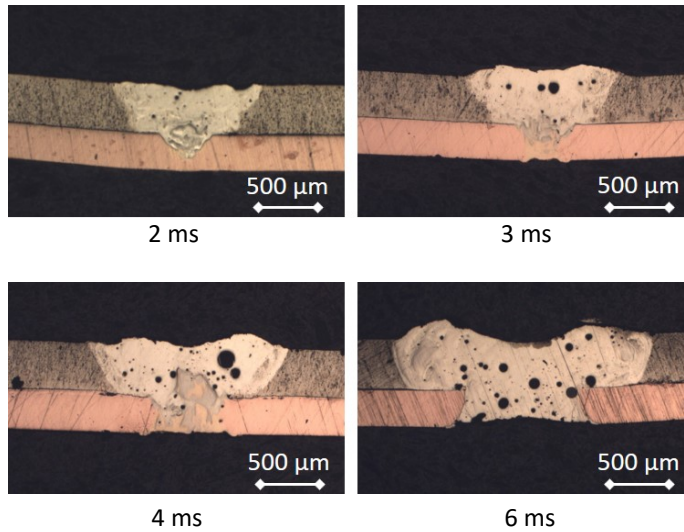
Examples of weld beads (Trumpf HL-204P)
